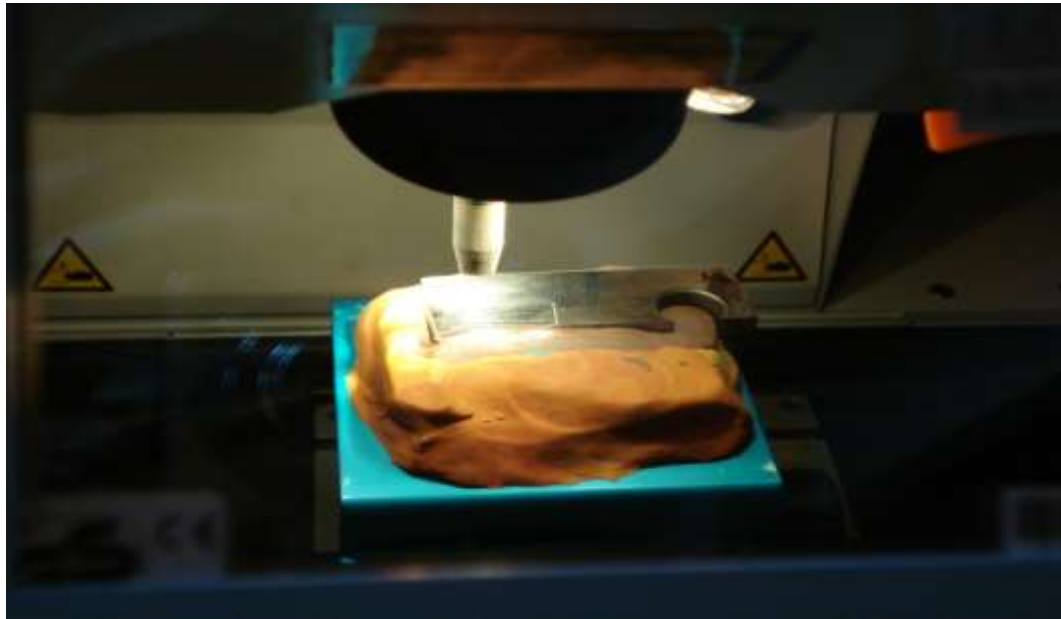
Examples of welded parts in CNC mode using ROFIN SW6002 laser installation.
